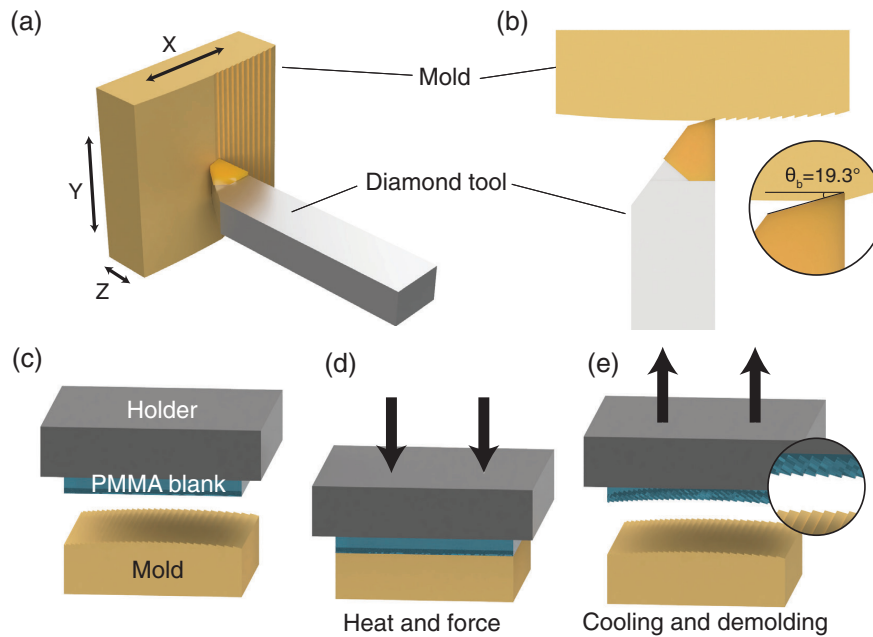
Variable spacing concave blaze grating fabrication. Diamond tooling of grating grooves on a convex substrate: (a) three-dimensional and (b) top views. Hot embossing of grating replicas: (c) general overview prior to the embossing; (d) embossing with force and temperature applied; and (e) cooling and demolding of a final replica.
